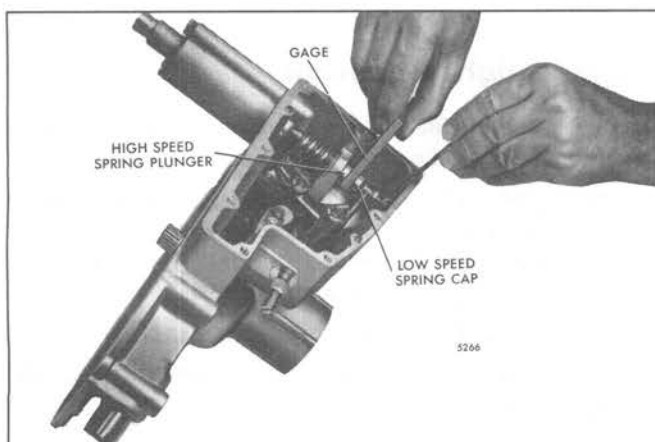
Adjusting Governor Gap (Single Weight Governor) with Feeler Gage J 23478
